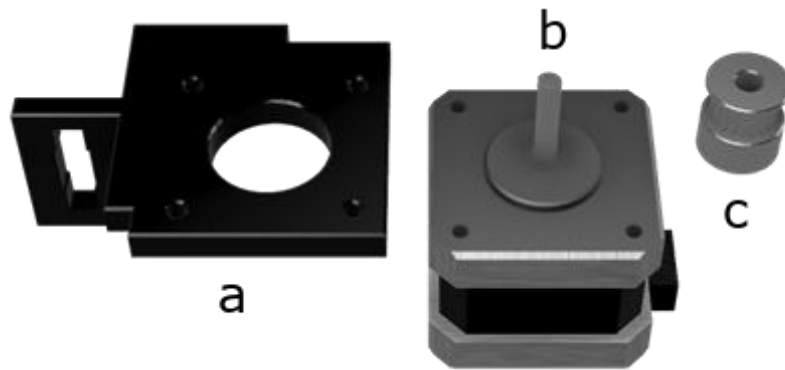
(a) PLA-printed part for stepper motor mounting; (b) NEMA 17 stepper motor; (c) 20-tooth pulley for a 6 mm GT2 belt.
